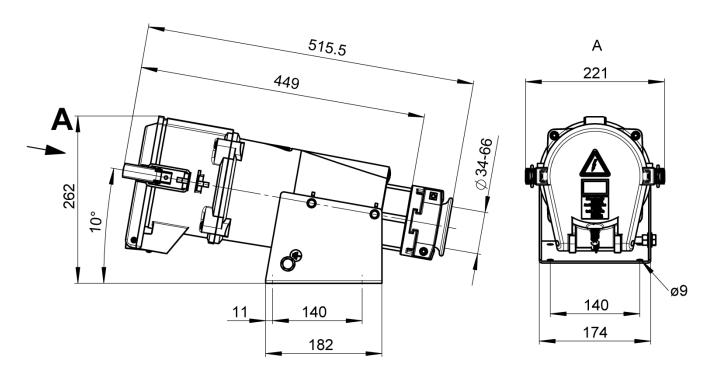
Dimensions Female Connector Wall FCW B-Line (250 A – 400 A) in mm
